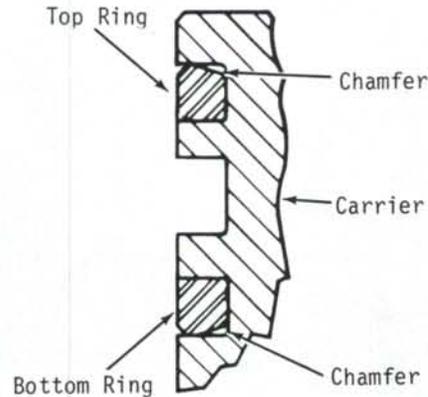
Sealing rings must be installed in center carrier with inside chamfer up on top ring and inside chamfer down on bottom ring. Ring gaps must be 180° from each other.
